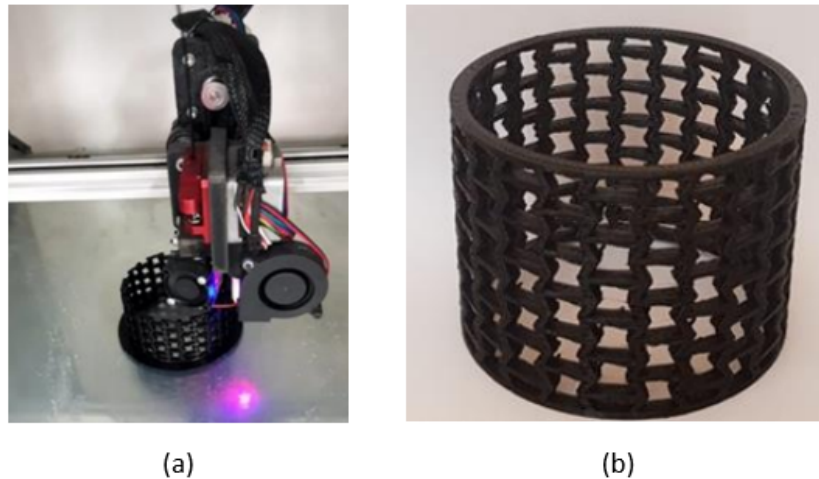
Additive manufacturing: (a) 3D printing process; (b) auxetic tube (adapted from [32]).
